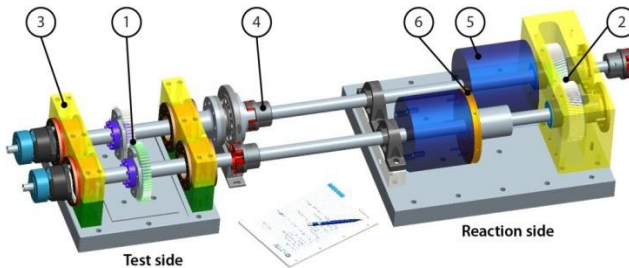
Test rig three-dimensional representation. 1. Test gears; 2. Reaction Gears; 3. Bearings support plates; 4. Flexible couplings; 5. Flywheel; 6. Clutch flange for preload.
